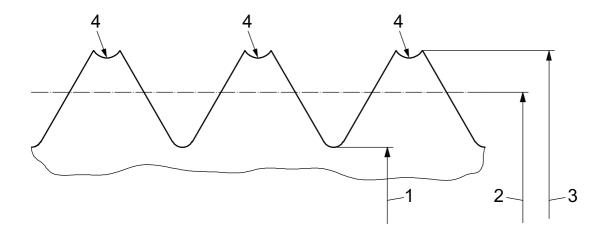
Non-permissible laps, seams and surface irregularities in threads
